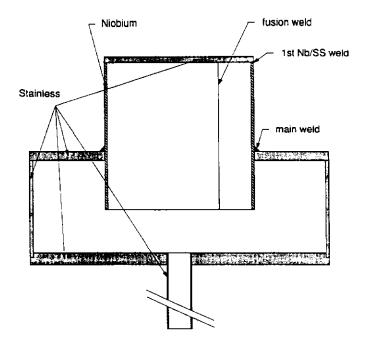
Test-piece for Niobium-Stainless welds
